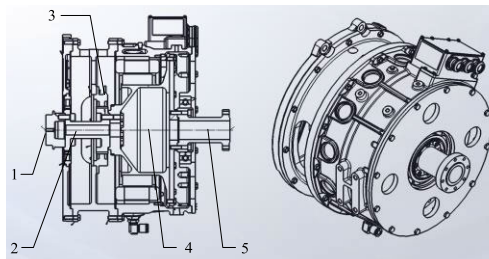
Mechanically modified structure. 1. Engine crank end, 2. Extended ISG shaft, 3. Encoder, 4. ISG motor, 5. Output shaft.
